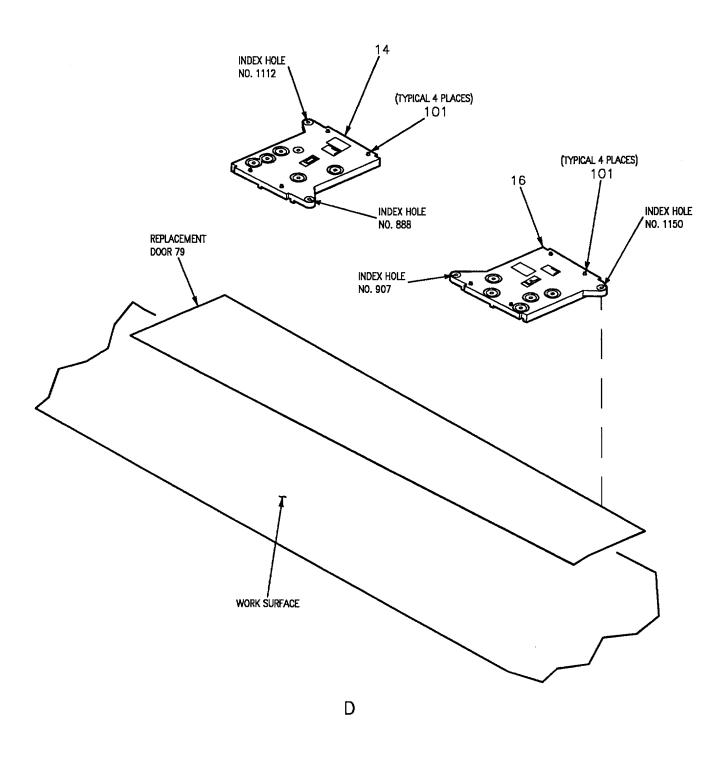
Installation of Plate Set for Drilling Door 79 (Sheet 3)
